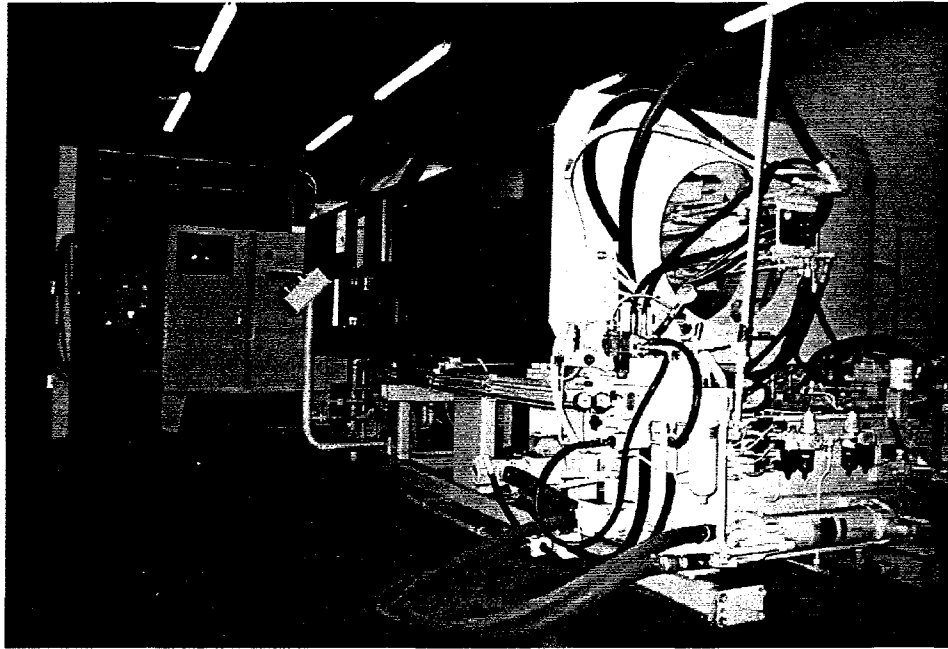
External view of modified die casting machine used for metal compression forming of the prototype motor mount bracket.
